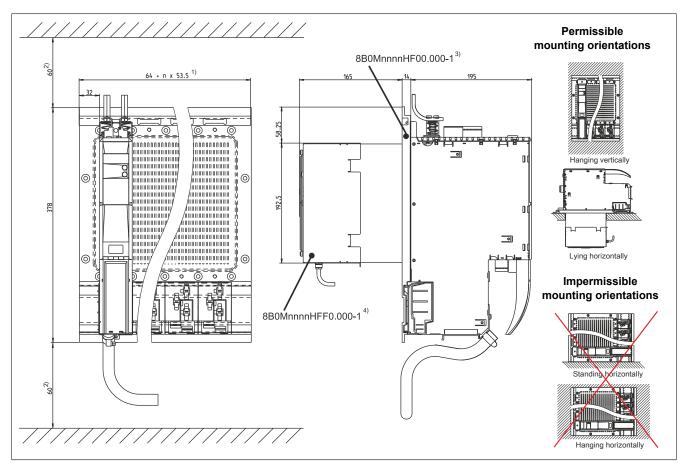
Feed-through mounting - Dimension diagram and installation dimensions
